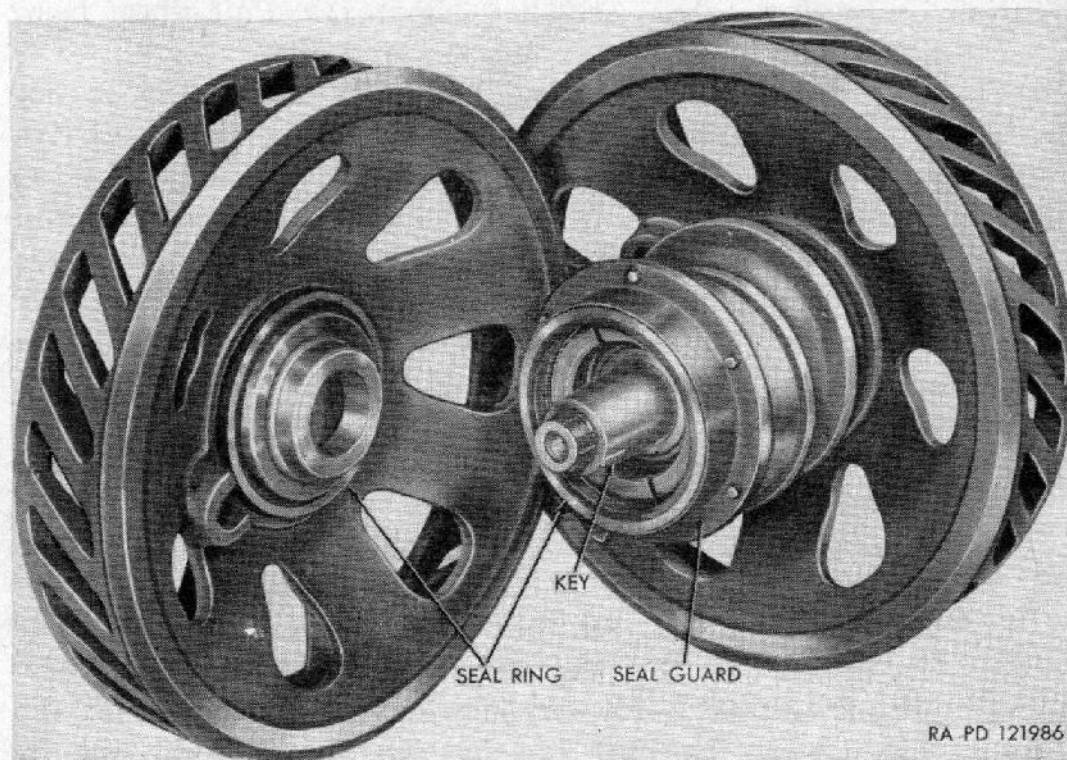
Seal rings and seal guard installed in idler wheel assembly.
